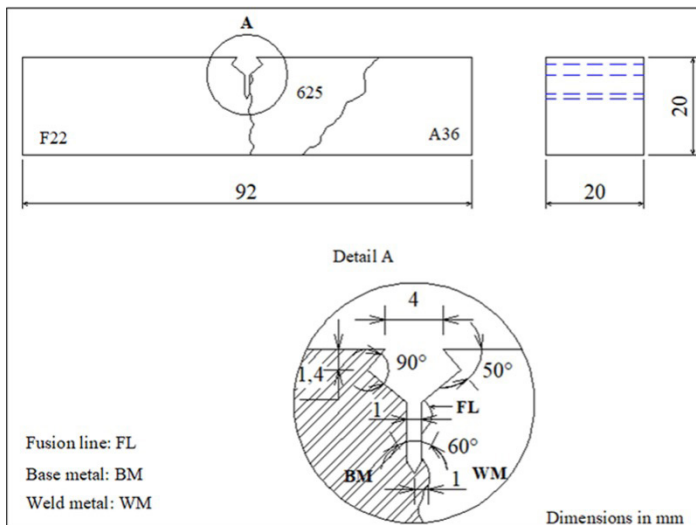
Location of the fatigue pré-crack in CTOD welded joint specimens.
